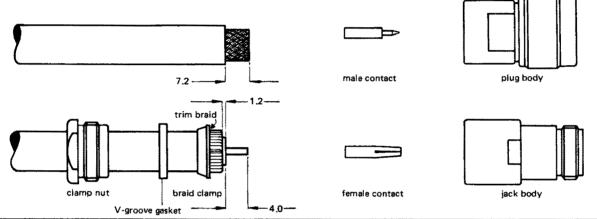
Improved MIL style braid clamp, non captive centre contact
